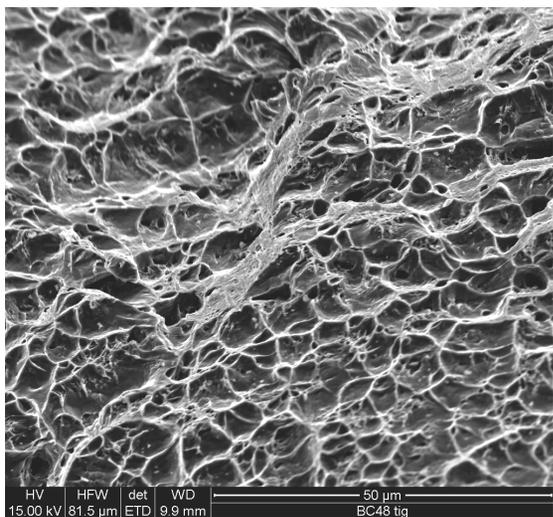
SEM fracture appearance of the broken tensile TIG welded specimen of the cobalt-free maraging steel after full heat treatment, with ageing at 480°C
